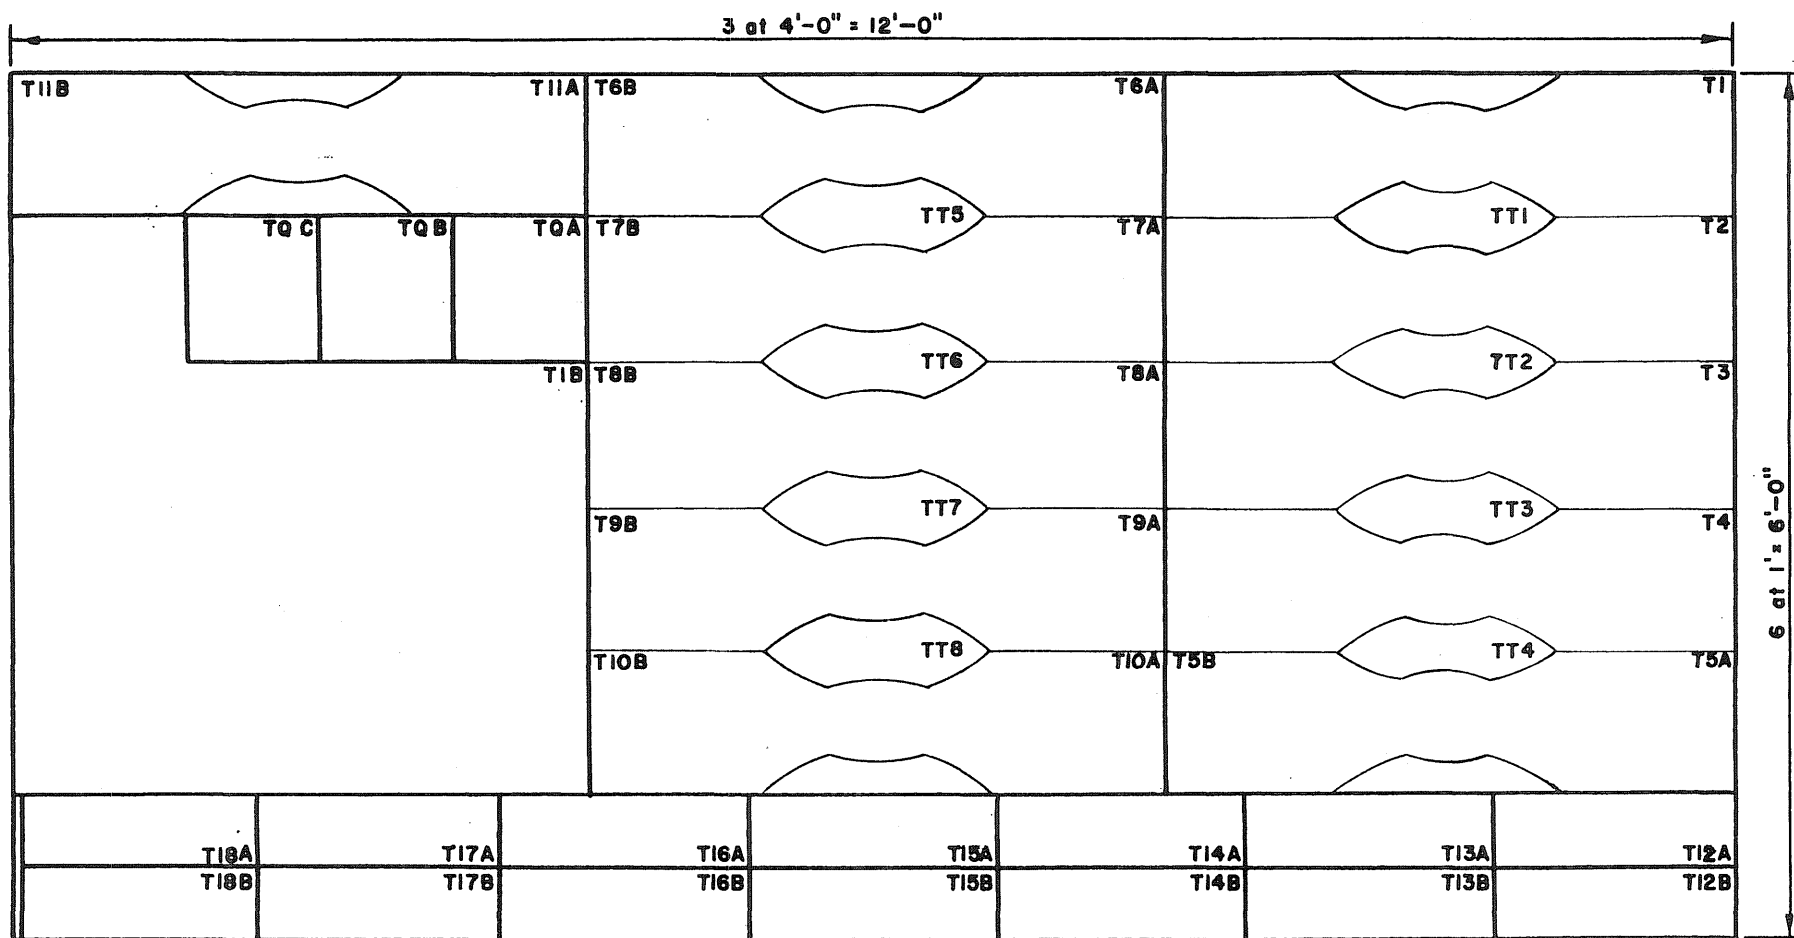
PLATE LAYOUT FOR STEEL T, ASTM A-242, $\frac{3}{4}$ " THICK
